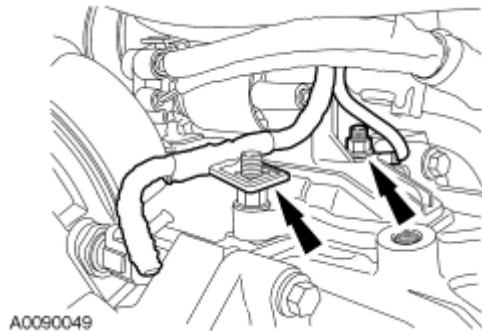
Locating Wire Harness Clip Retainer & Starter Bolts
